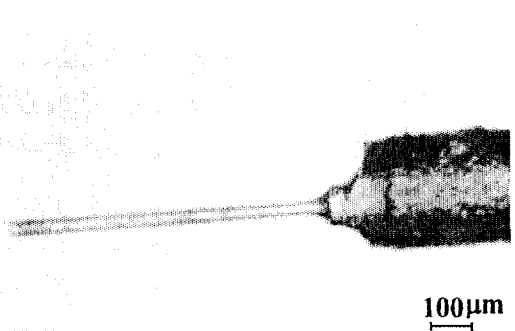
Example of Machined Microshaft (Diameter 40μm, Length 900μm)
